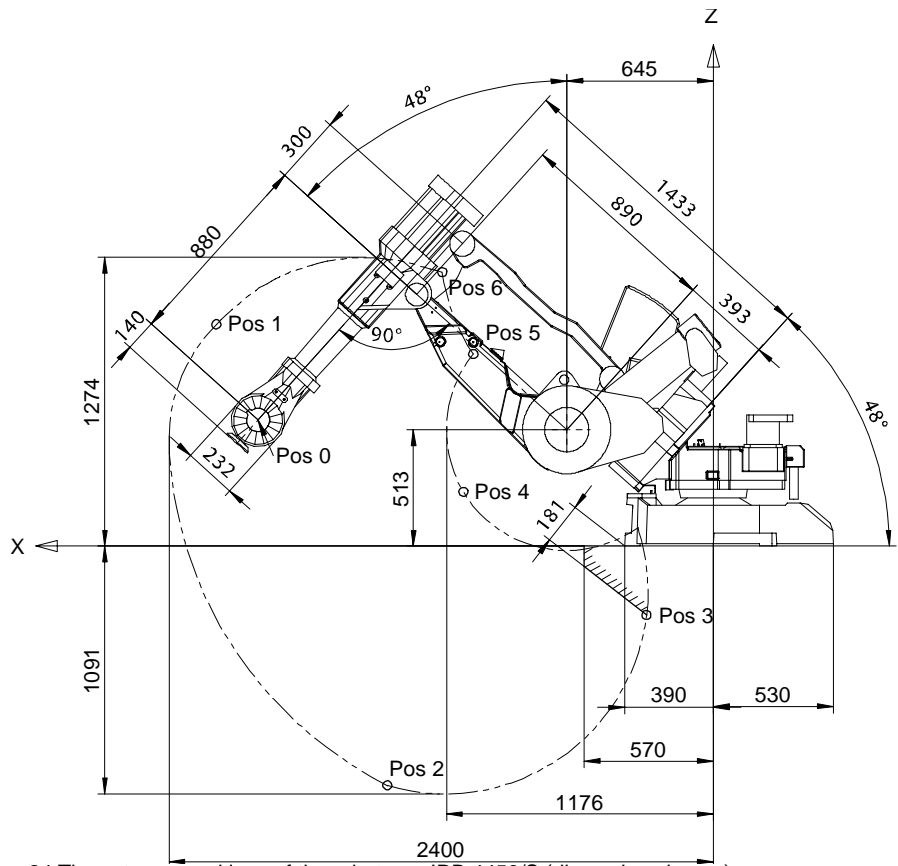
The extreme positions of the robot arm IRB 4450/S (dimensions in mm).
